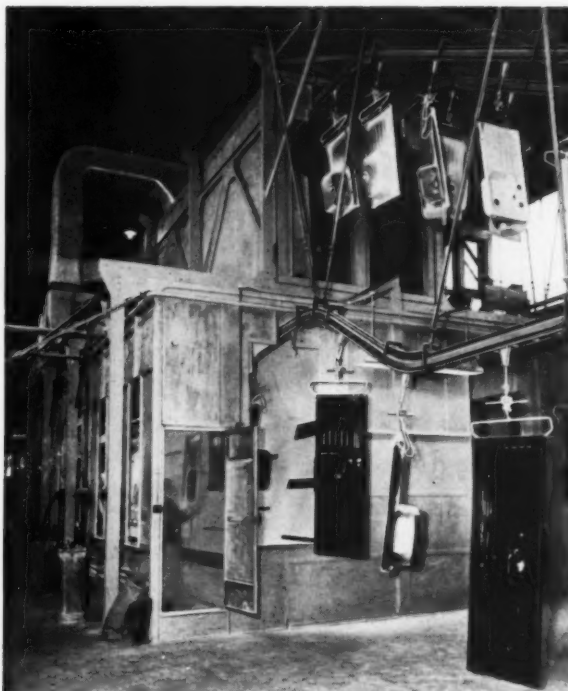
(Above) After the grip coat is fused on Conveyor No. 7 on the ground floor at Nottingham Road works, the coated pressing is lifted on to Warehouse Conveyor No. 8 which takes it to enamelling on the first floor
